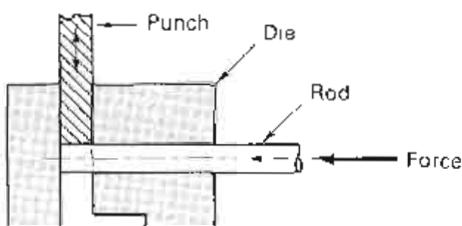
Method of smooth shearing a rod by putting it into compression during shearing.
